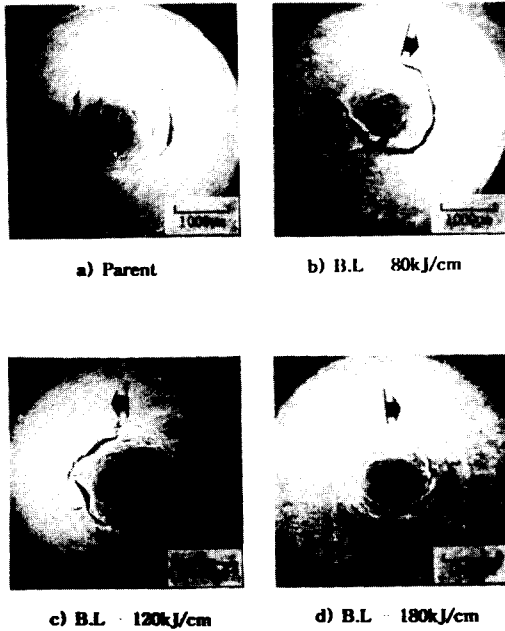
SEM macrofractographs for weld joint of TMCP AH36 steel in SSW pH8.2
